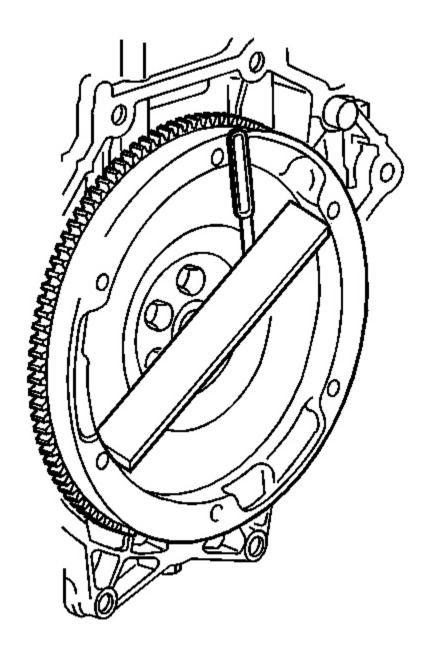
Inspecting The Flywheel For Warpage Using A Straight Edge & Feeler Gage Courtesy of GENERAL MOTORS CORP.
